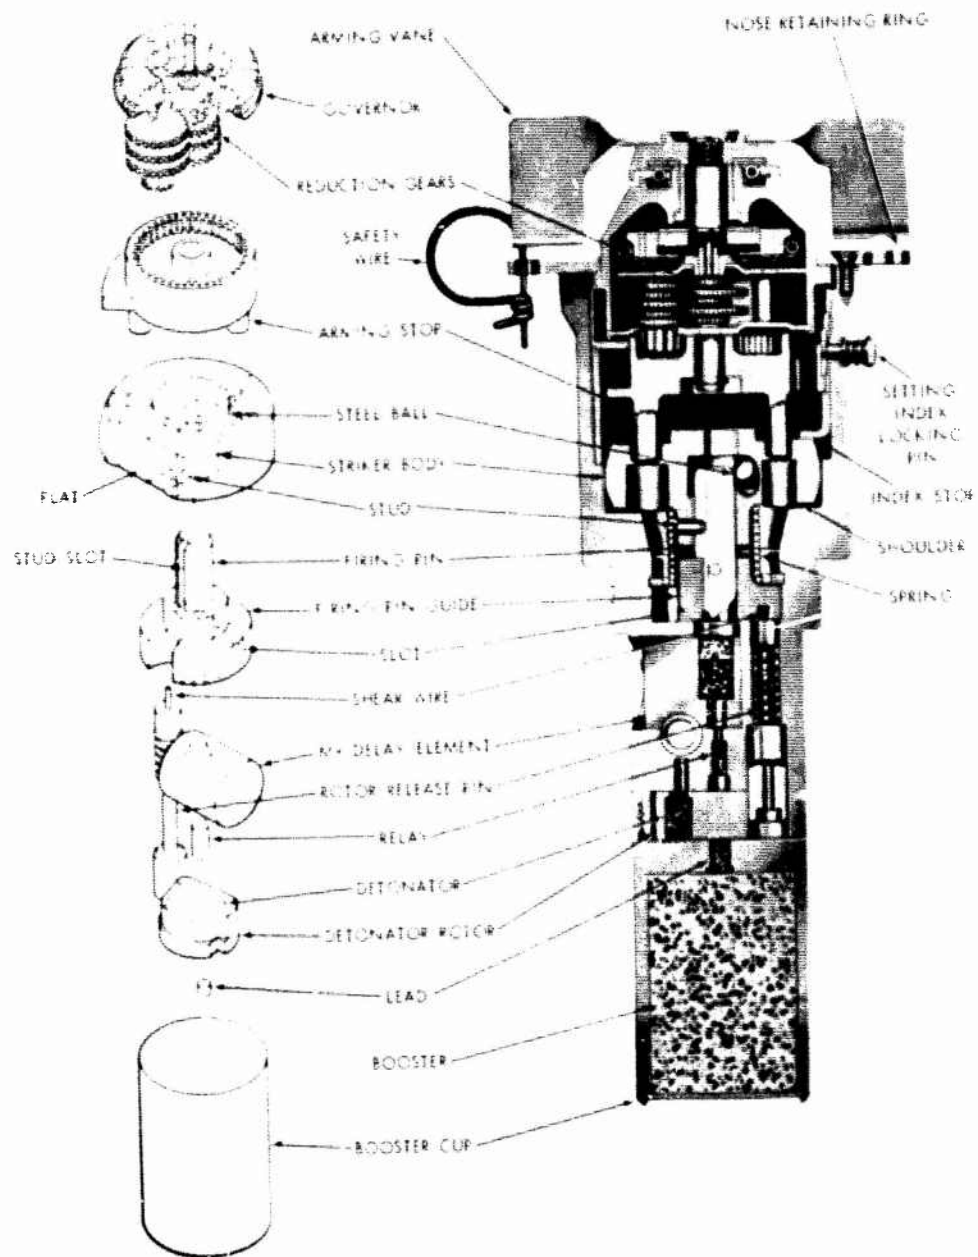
MECHANICAL NOSE FUZE M904E2 - SECTIONAL AND EXPLODED VIEWS
